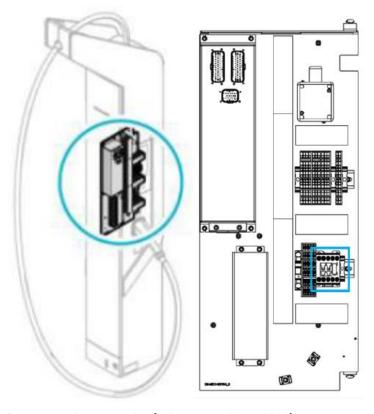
Pump actuation contacting (reference marking: -KM1) on upper mounting plate
